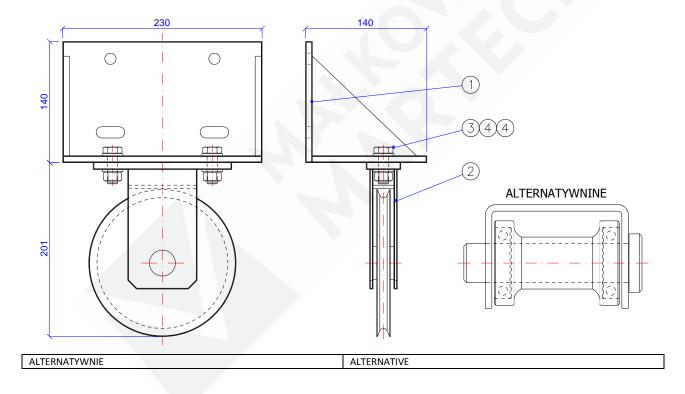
MARC-O60-01.04.00 [Cable/belt pulley assembly]
